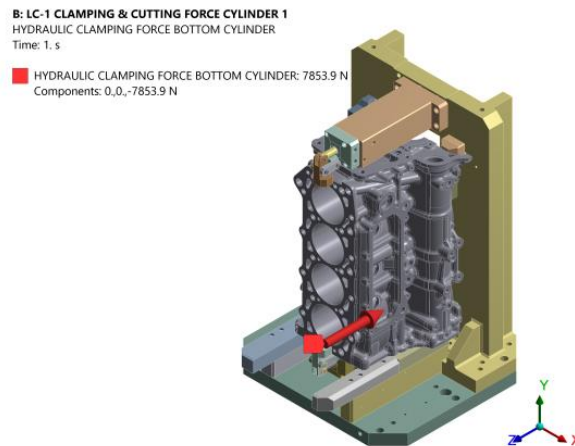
Hydraulic Clamping Force by Bottom Cylinder
